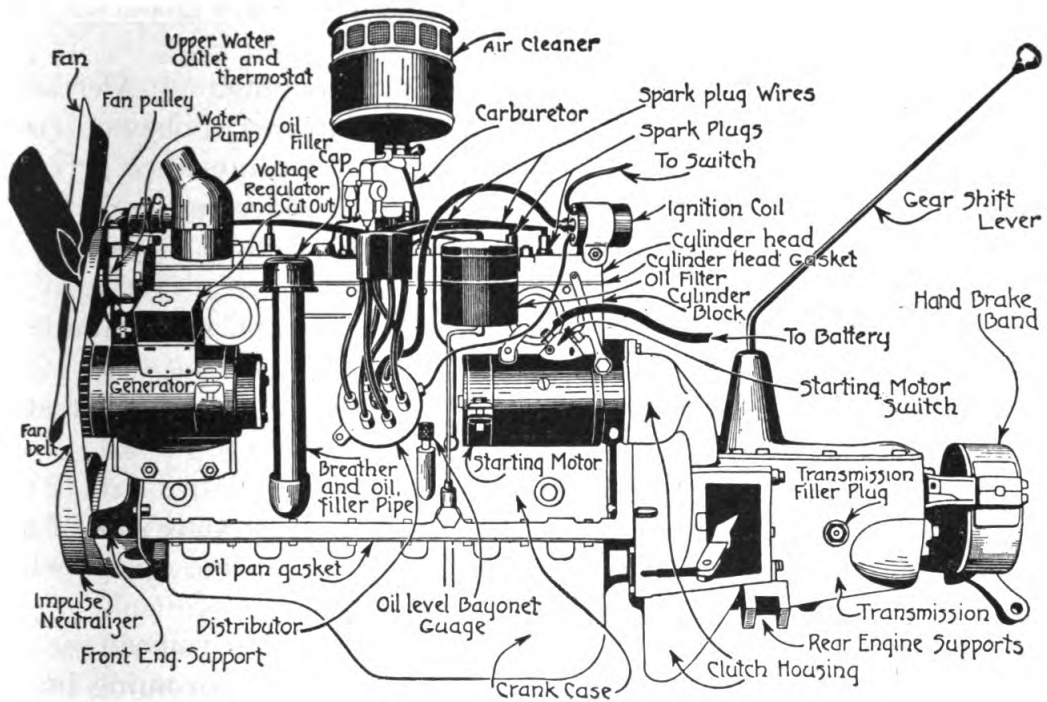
Typical engine and transmission assembly showing external parts, equipment, and accessories.
